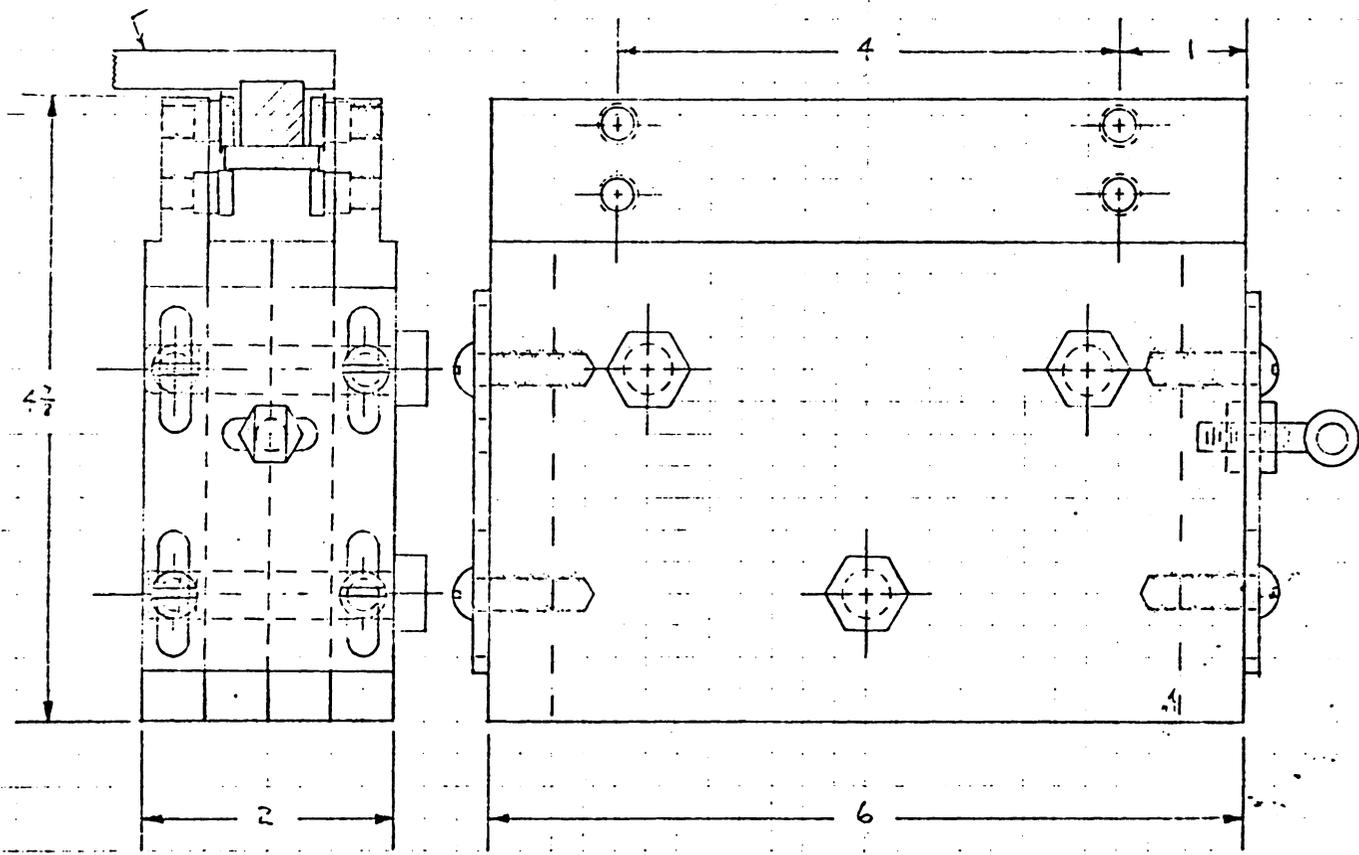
Assembly Details for the Single Bogey and Heavy Bogey
